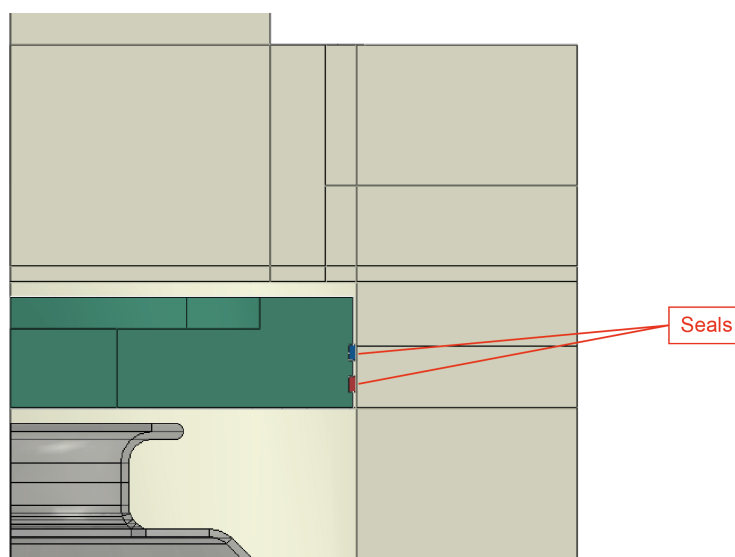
Push-fit inner lid with seals on cylindrical face foreseen for the RP-HLW canister
